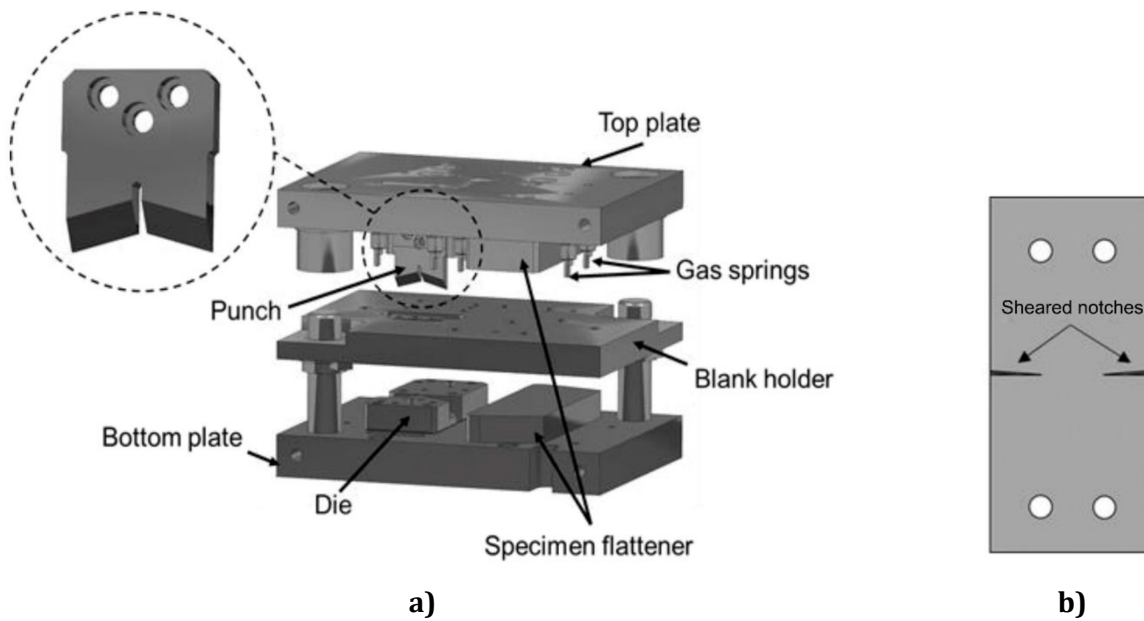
a) Tool for introducing sharp notches in sheet metal specimens and detail of the bevelled punch. b) DENT specimen with sheared sharp notches [60]
